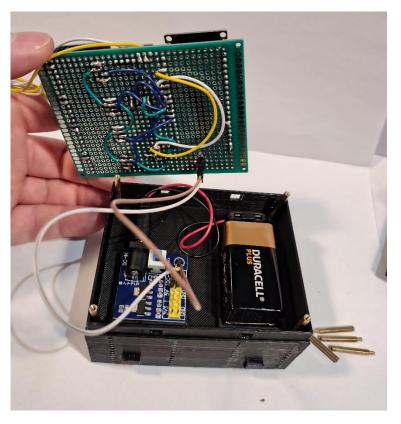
; Connection between 5V transformer board and the PCB (Mk.4)
